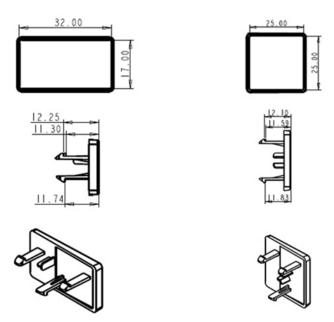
2U Front Bezel Accessory - ID Badge Option Mechanical Drawings
